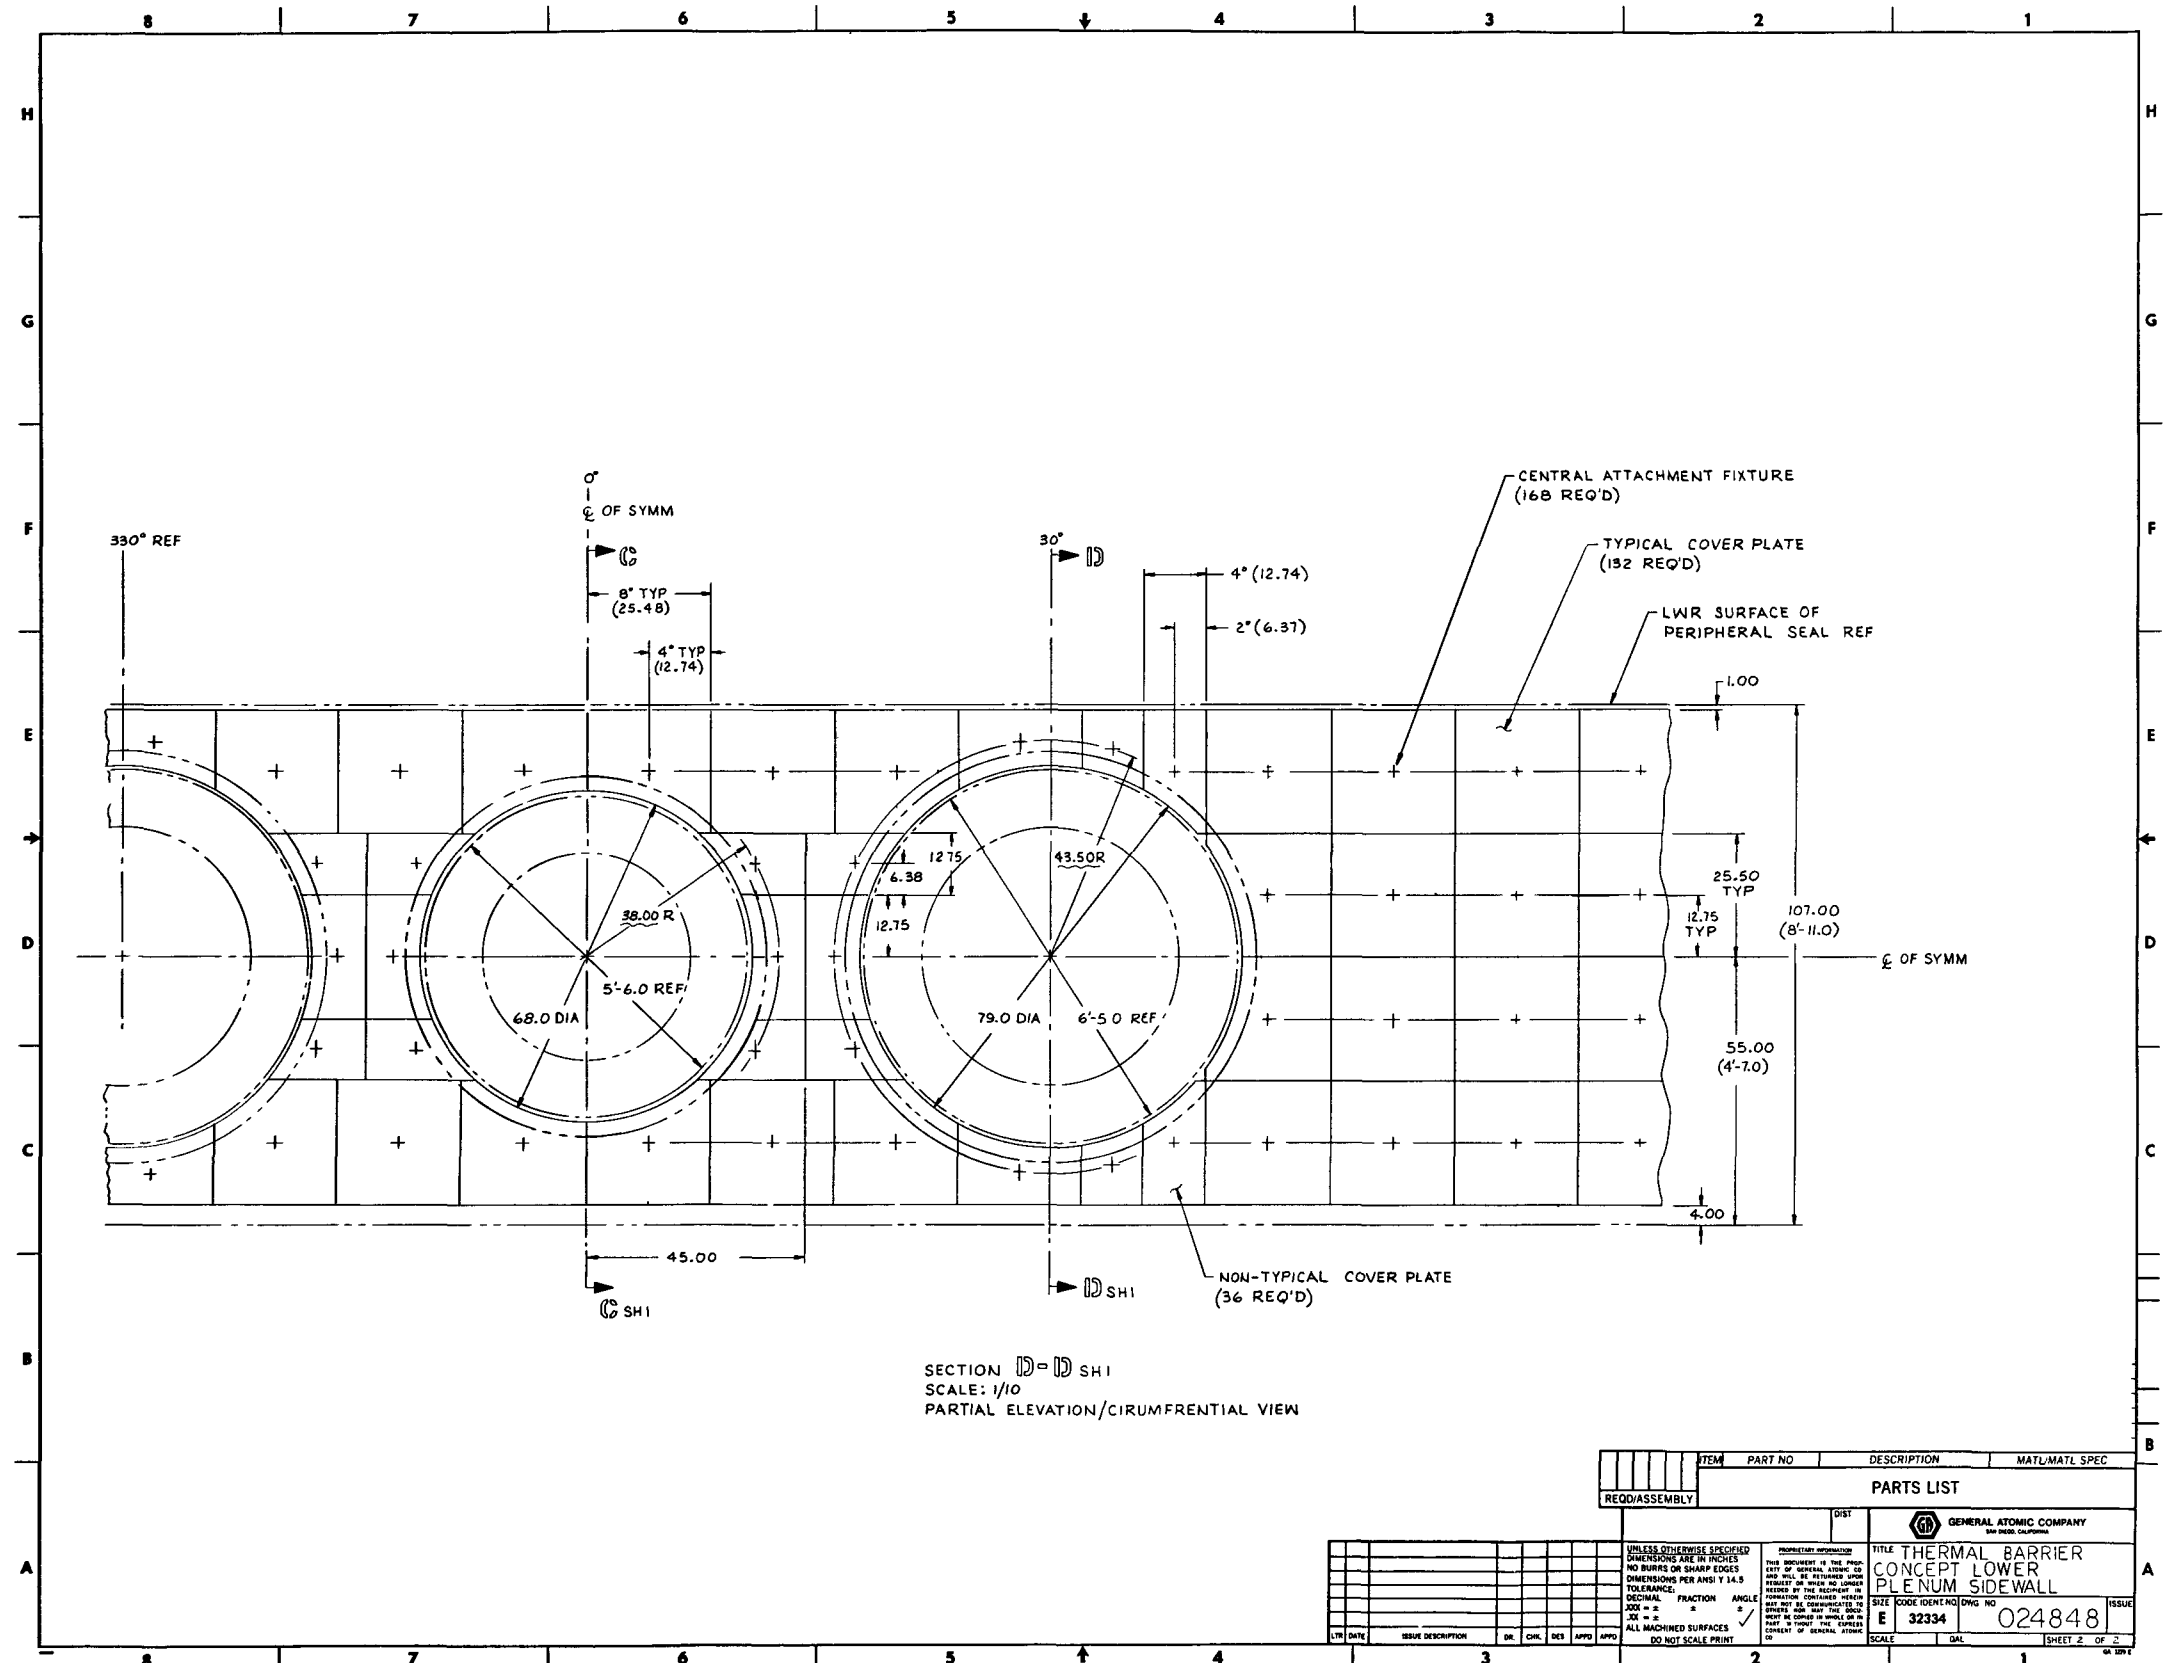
Thermal barrier core exit plenum sidewall (sheet 2 of 2)
